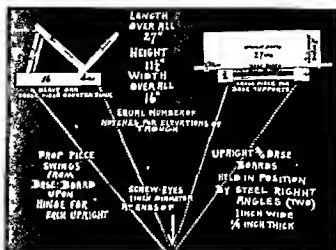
Trough dimensions. Back supports 3 inch tubular at end attached support with hinges.
